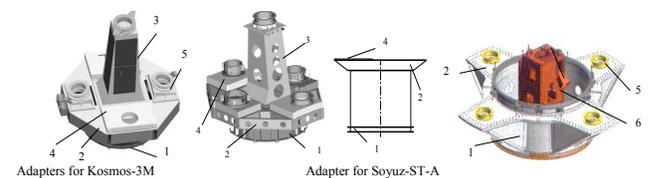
Adapters for SSV End Installation 1 – LV attachments; 2 – SSV installation platform; 3 – upper SSV compartment; 4 – turntable; 5 – SSV support bracket (with or without a separation system); 6 – SSV inside the adapter.
